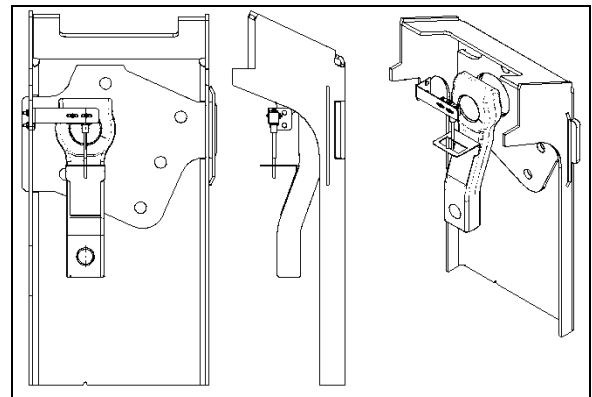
TAG AXLE UNLOADING SWITCH ADJUSTMENT 14061
